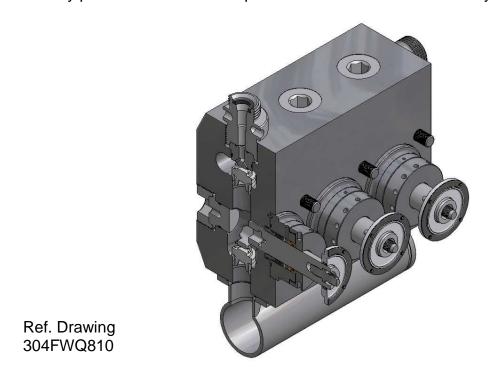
FLUID END ASSEMBLY 2.75" - 3" ISO VIEW
